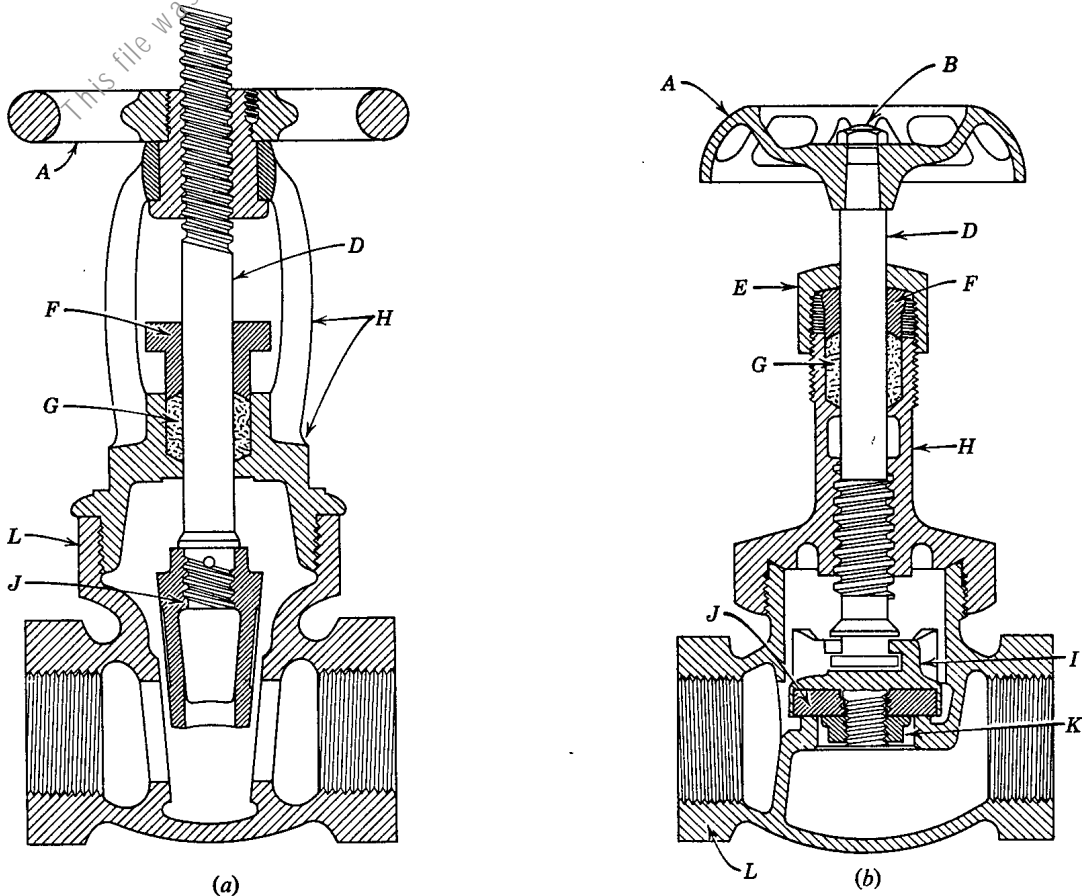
Sectional view of (a) gate and (b) globe valves.
